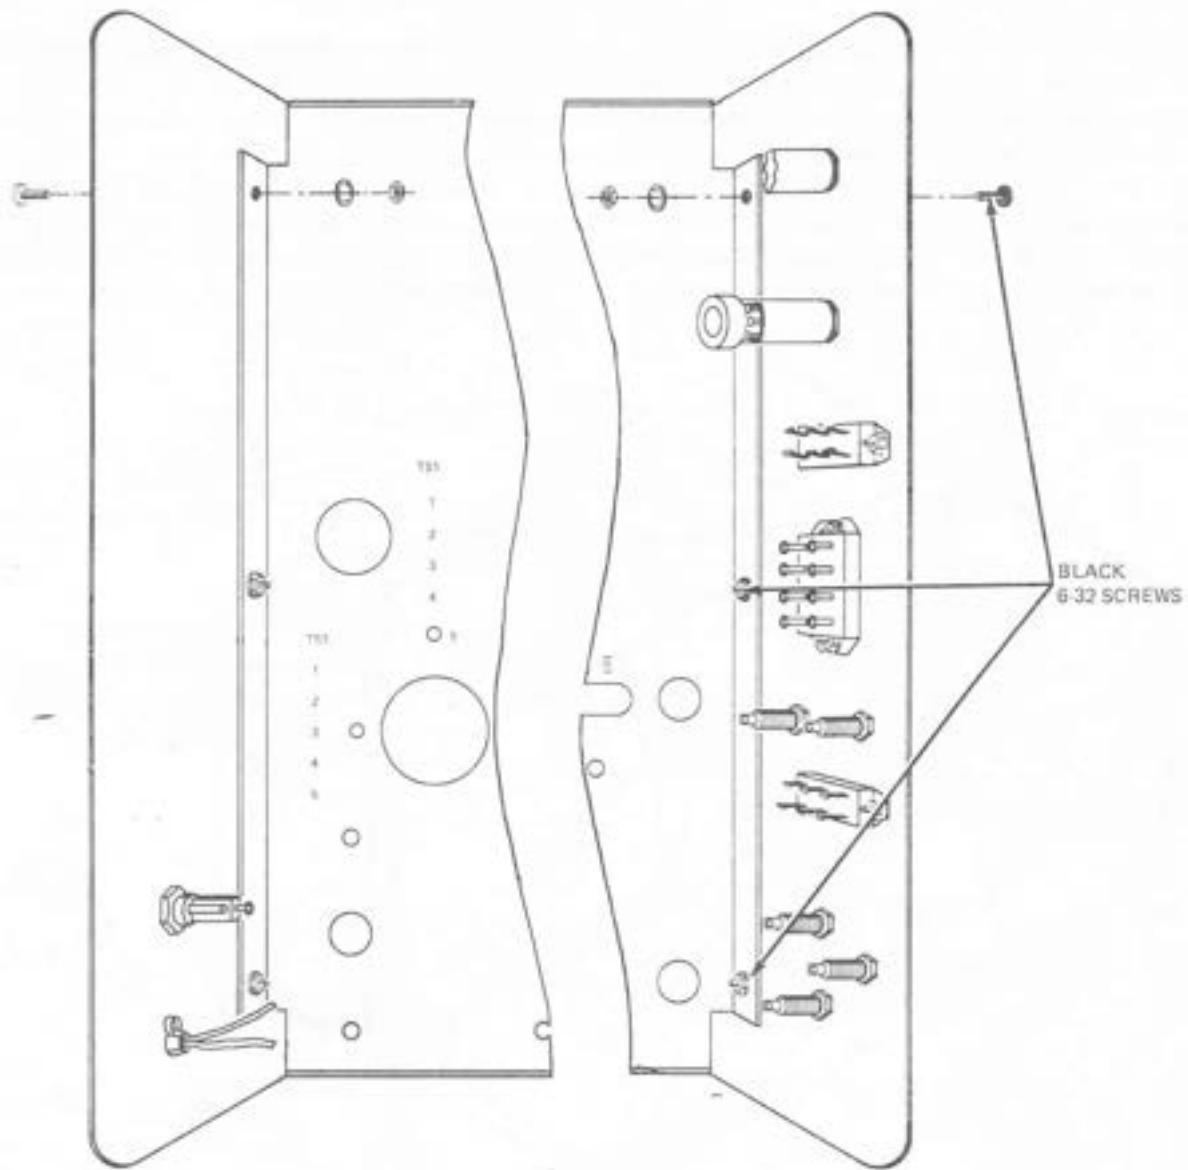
Mounting the front and back panel assemblies to the main chassis.
